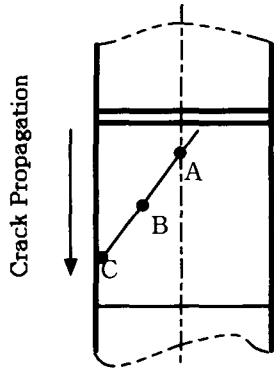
Picture Point of Fracture Surface for Un-peening
